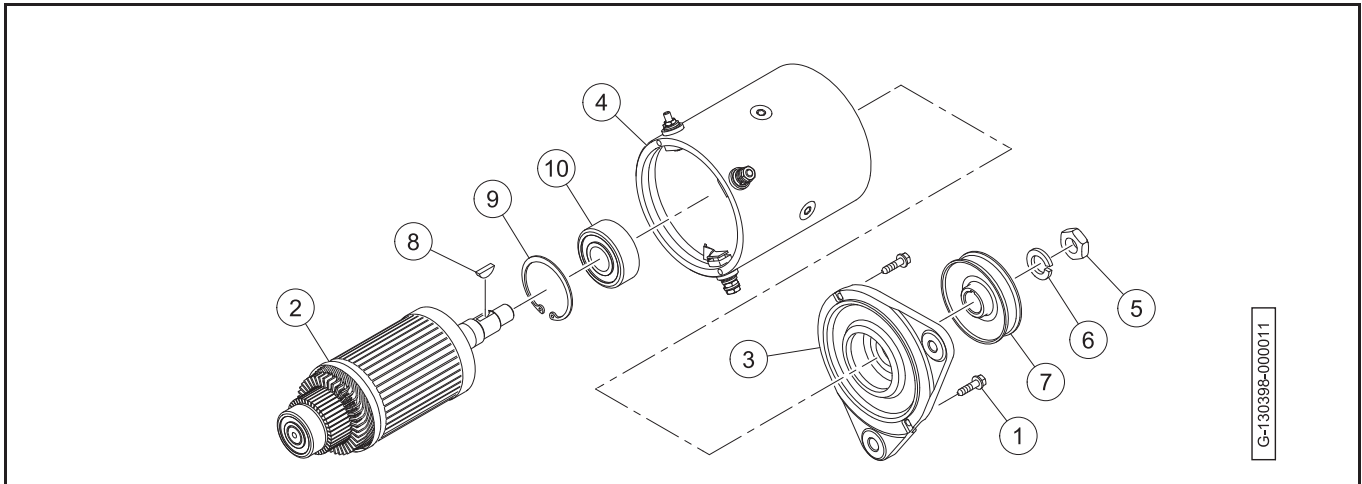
Output End Cover Disassembly, Armature and Housing
